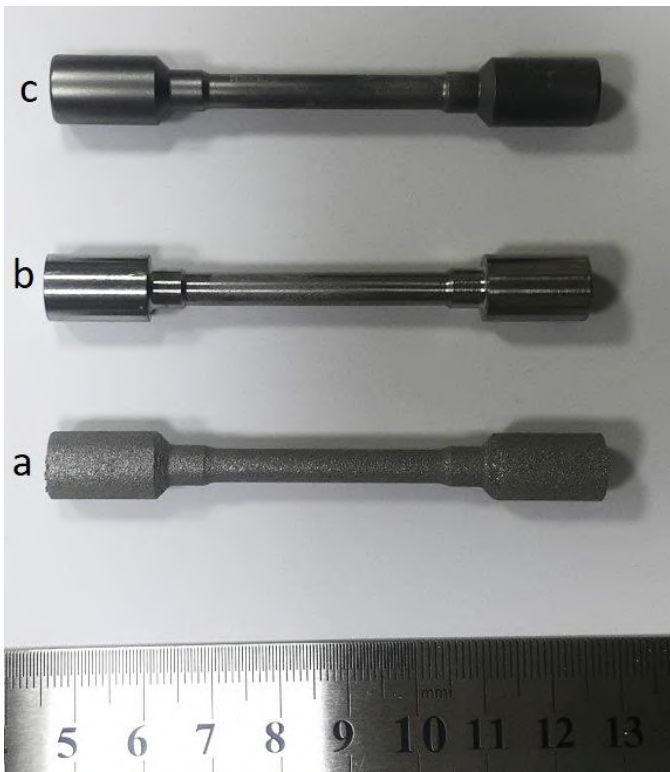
The parts were prepared for surface roughness and mechanical properties. 11.a. The part after manufacturing, 11.b. The part after lathe/turning operation, 11.c. The part after lathe/turning and sand-blasting operation
